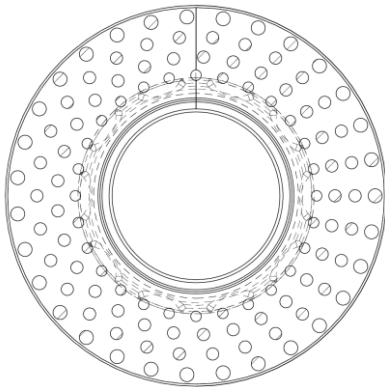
Cooling channel layout of the "*Variable*" brake disc
